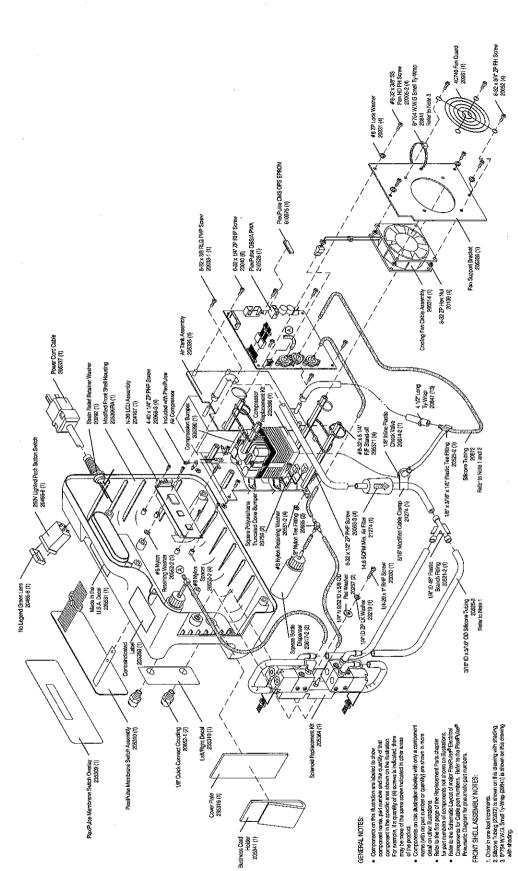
Exploded View of the PlexiPulse® Pump Front Shell Assembly (Green Button Pump with Solenoid/Valve/Manifold Assembly)
